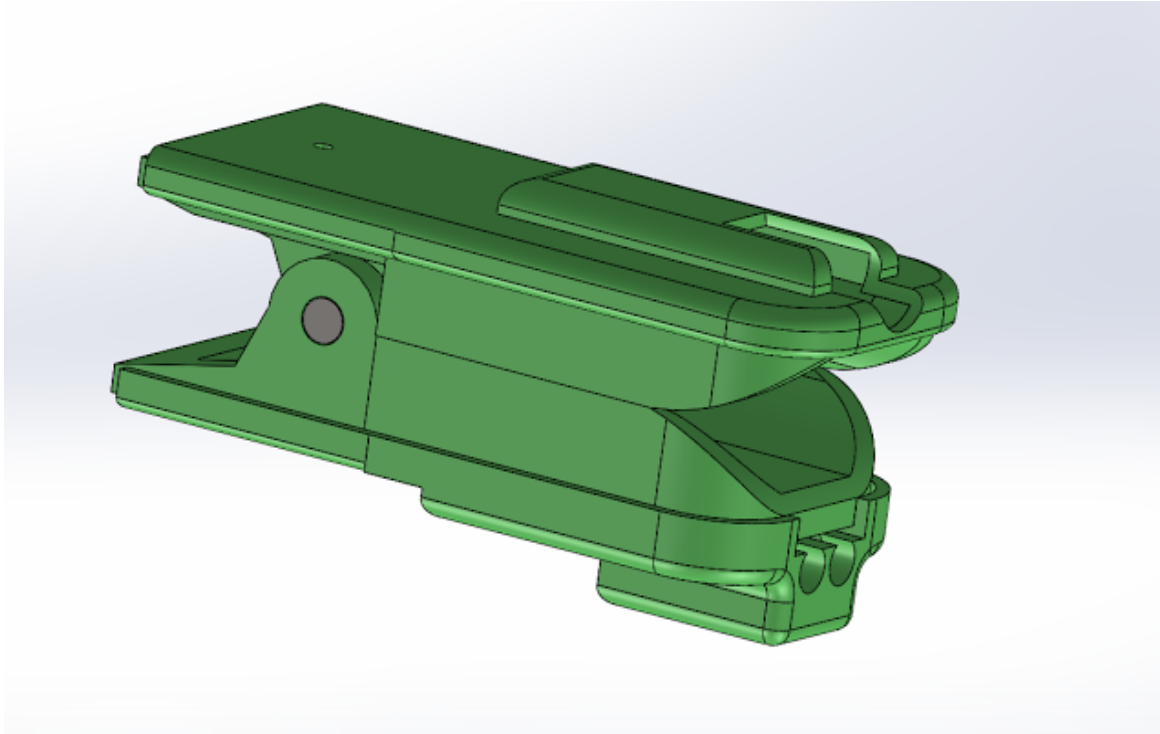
A CAD drawing of the toe clip design. The design consists of four 3D printed parts including the toe chamber and covers for the opto-electronic enclosures, a hinge to hold the chamber, and a spring to apply closing pressure onto the toe being measured.
